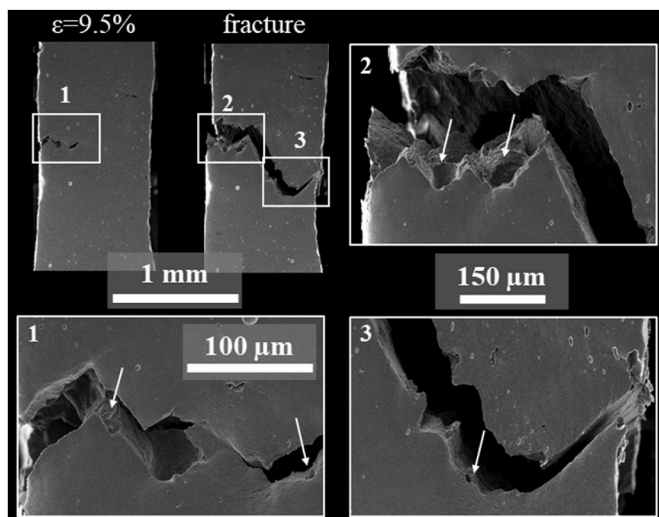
In-situ test of AlSi10Mg in vertical building direction. The crack is observed at an elongation value of 9.5% and fracture. The arrow indicates internal pores on the fracture surface.
